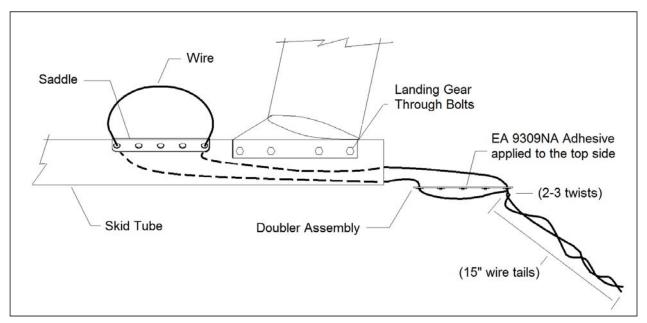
Wire Loop Routing for Doubler Assembly Installation (Not all landing gear assembly detail shown; removed for clarity)
